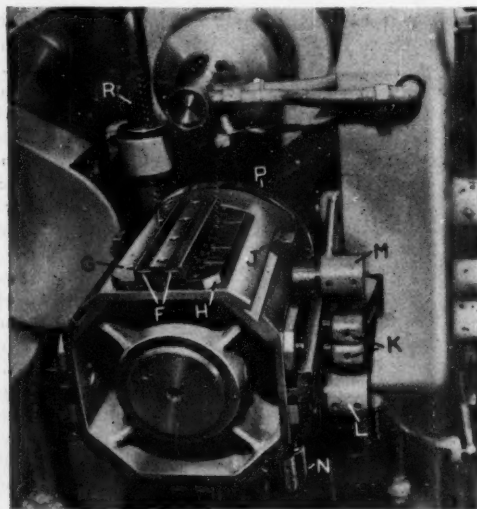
The Control Drum which is Mounted on the End of the Turret Shaft of a Monforts Machine. All Turret and Cross-slide Motions, also Speed and Feed Changes, are Controlled by Dogs and Cams on this Drum
